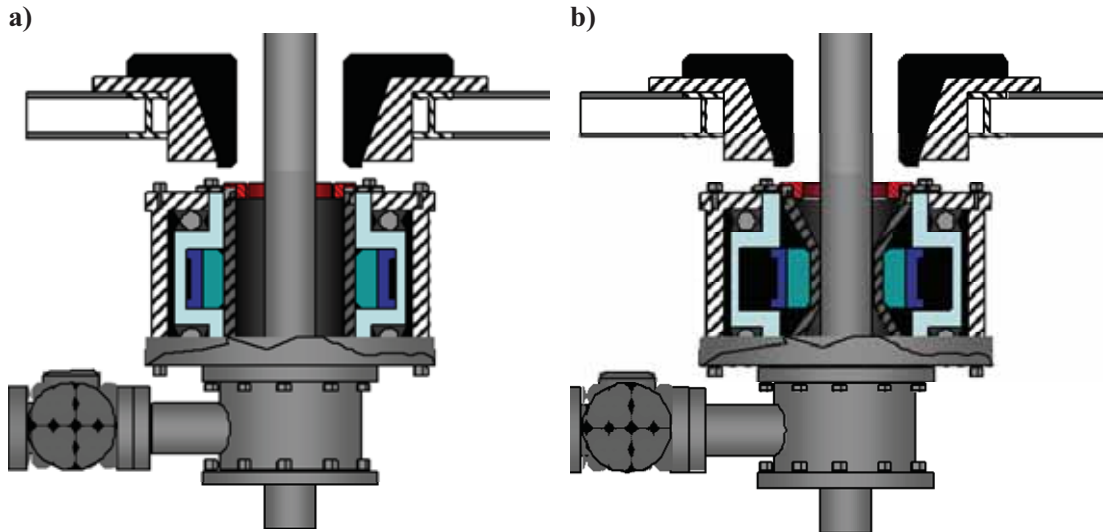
Kelly and kelly bushings of rotating head: a) with-out torque transmission; b) with torque transmission
